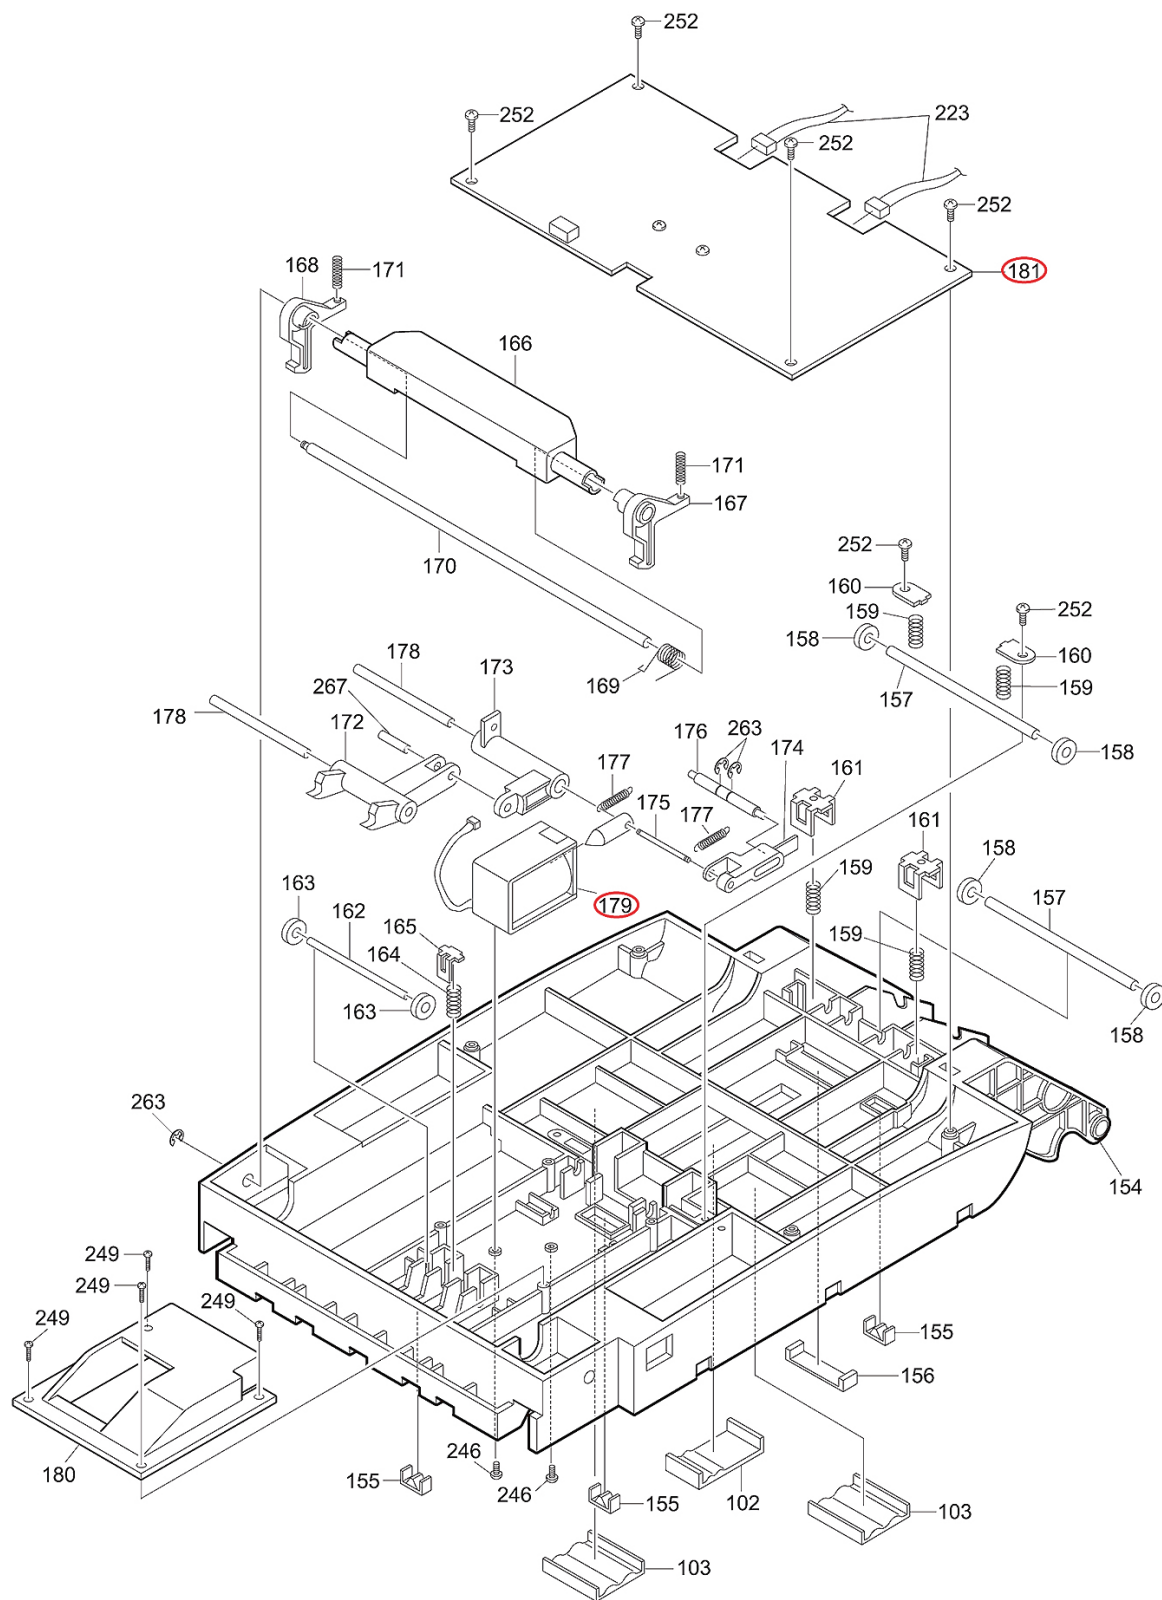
UBA Acceptor Unit Exploded View (Part 2)
